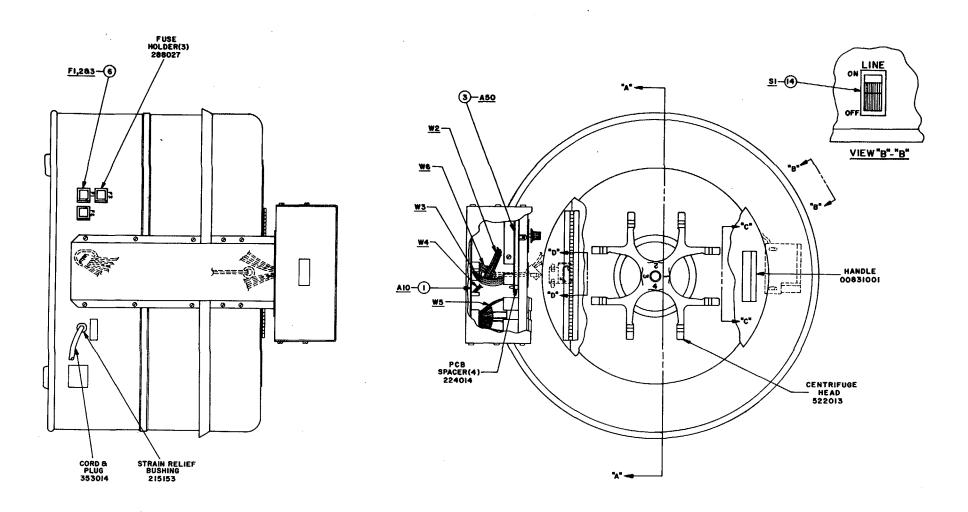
A. ASSEMBLY DRAWING (REAR AND TOP VIEWS)
